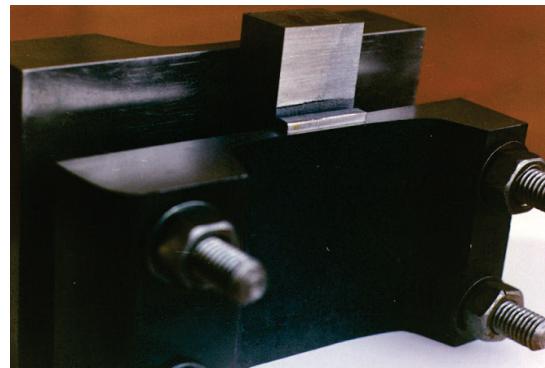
Auxiliary device for shear strength testing with testing specimen dimensions presented in Fig. 4
